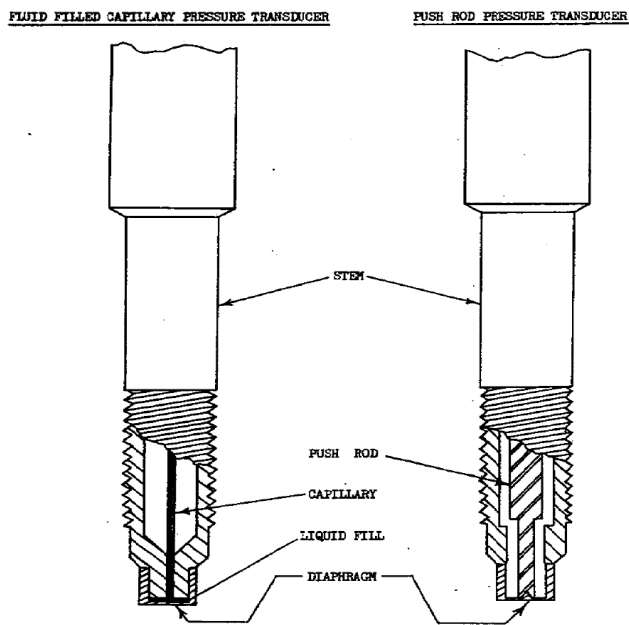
INTERNAL STEM CONSTRUCTION; PUSH ROD AND FLUID FILLED PRESSURE TRANSDUCERS.
